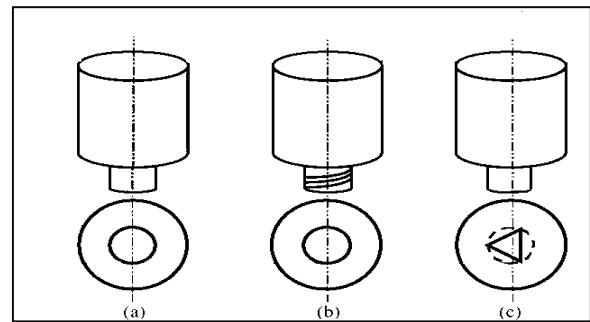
FSW tool shape: (a) column without threads, (b) column with threads, (c) triangular prism
